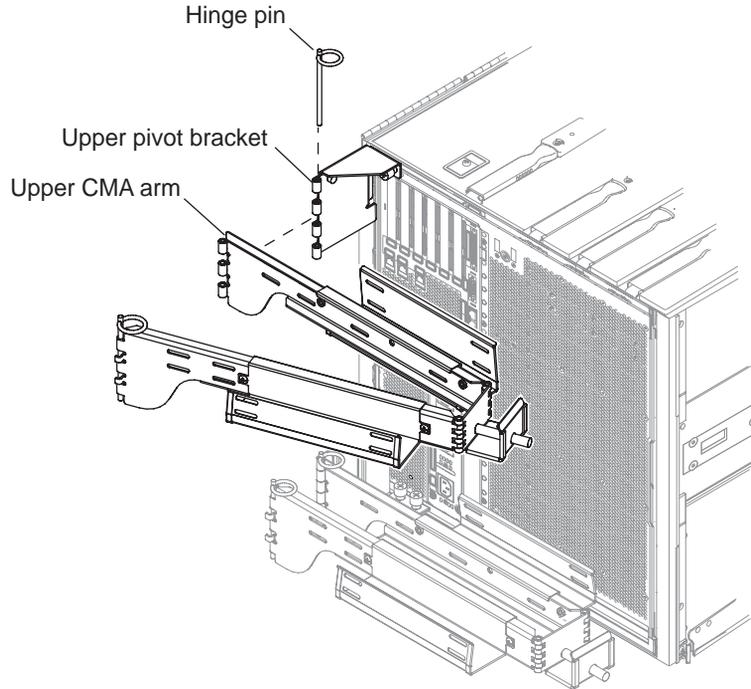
Detachment of Upper CMA Arm and Pivot Bracket
